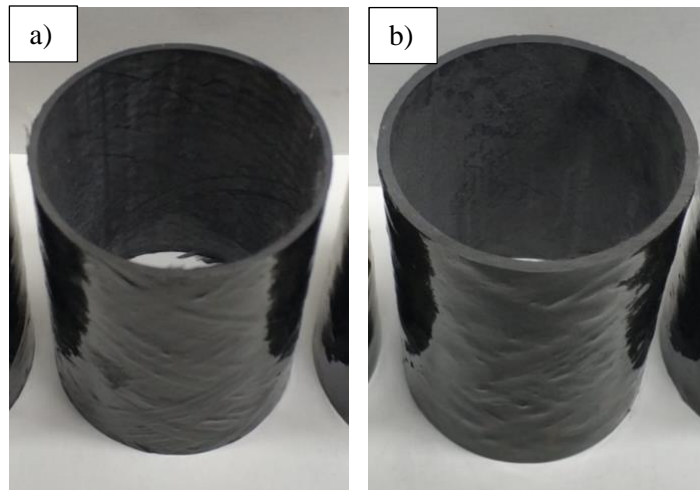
Sectioned test samples before radial compression test, a) 5CE, b) 4CE 1P
